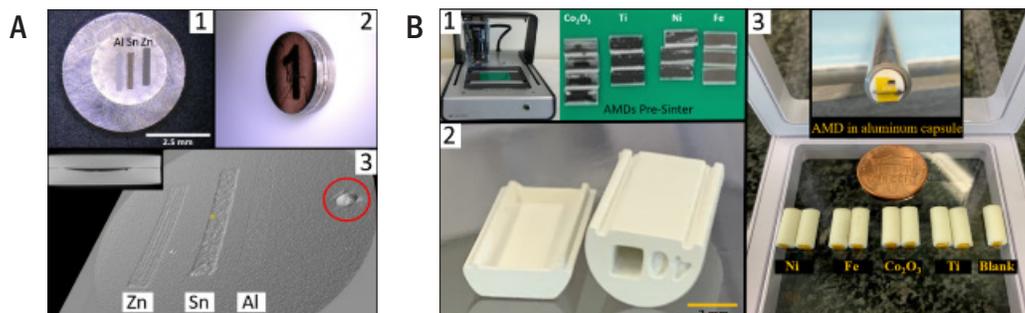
Initial prototypes of advanced manufactured melt wires (A) and neutron dosimeters (B). AM melt wires were fabricated within a small dimple pocket created in a stainless steel disc (A1), a second steel disc was placed on top and the two pieces were welded to encapsulate the printed melt wires (A2). X-ray computed tomography is then used to visualize the printed wires before and after heating (A3). A fully printed neutron dosimeter assembly and the alumina dosimeter holder was created via an additive technique.
